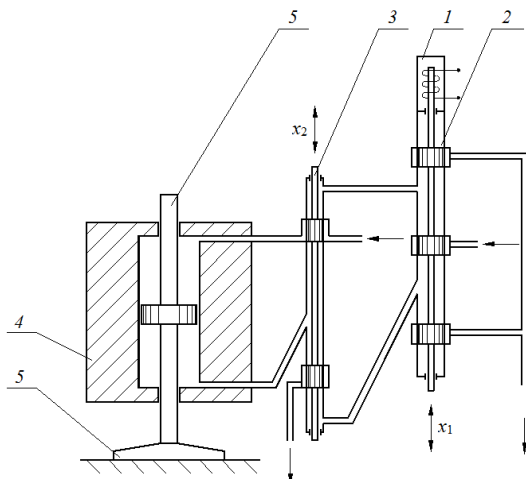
Basic diagram of the hydraulic throttled vibrator
